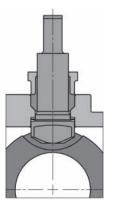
Robust Stem with deep engagement. Excessive torque can only cause failure outside the body.
